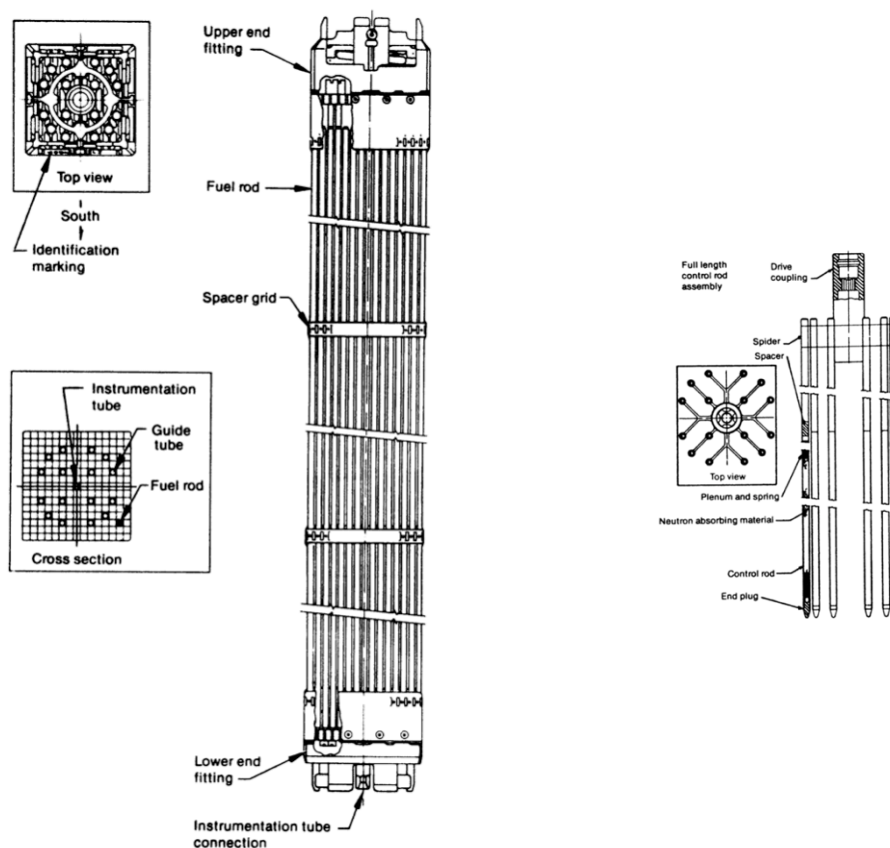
General Configuration of 15×15 Fuel Mark B Assembly, left; Control rod Assembly right. (GEND-INF-082)
